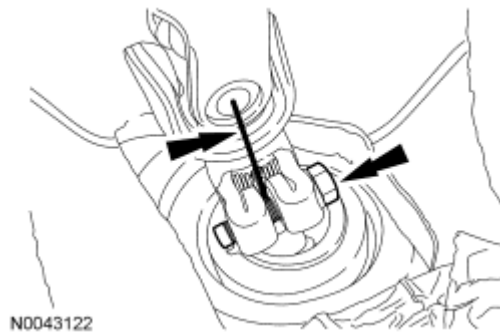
Locating Steering Column Shaft Index Mark And Bolt
